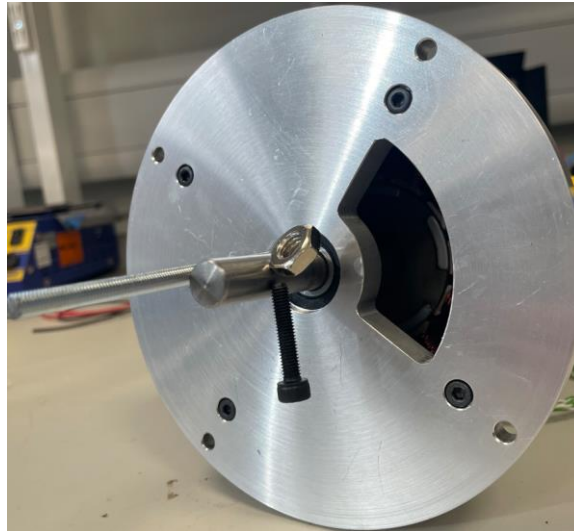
Crews and nuts attracted in the end region of the 12s/10p machine with conventional rotor and magnetic shaft after assembling due to the unipolar end leakage.
